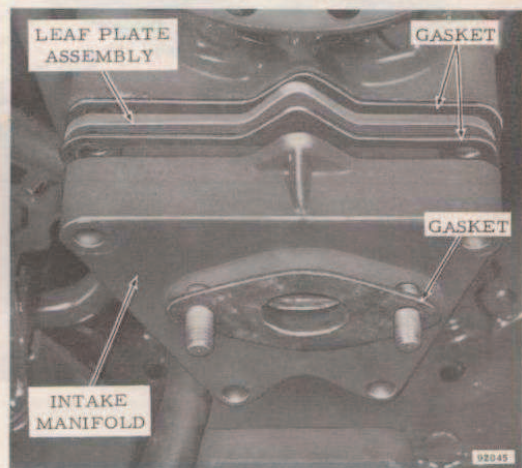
Removing Manifold and Leaf Plate Assembly
